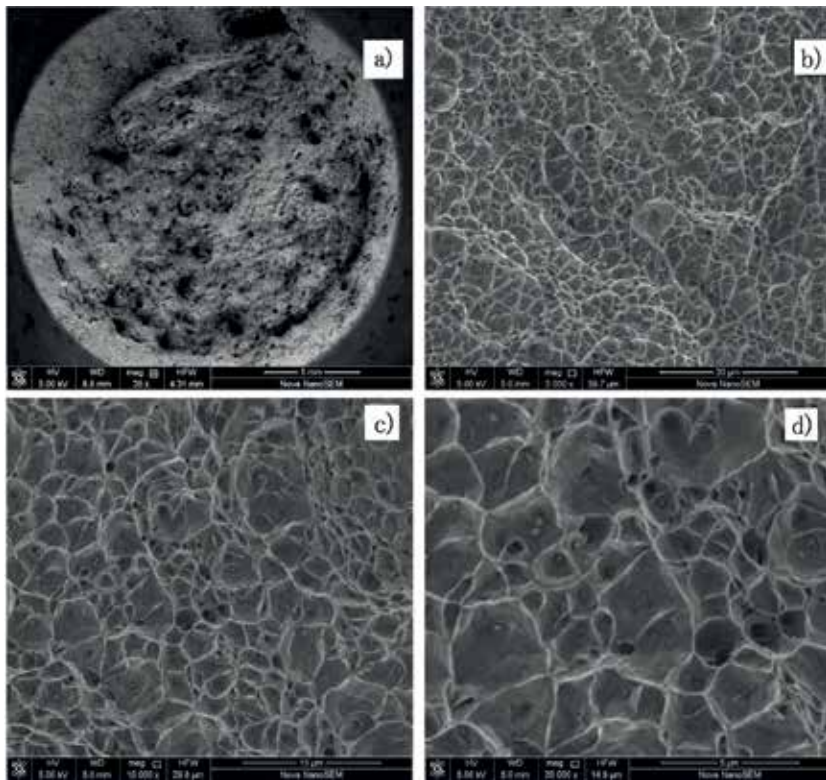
Fracture surface morphologies of FV520B steel fabricated by laser cladding. (a) Macro morphology of fracture surface; (b) fracture surface by 5000 times; (c) fracture surface by 10,000 times; (d) fracture surface by 20,000 times.
